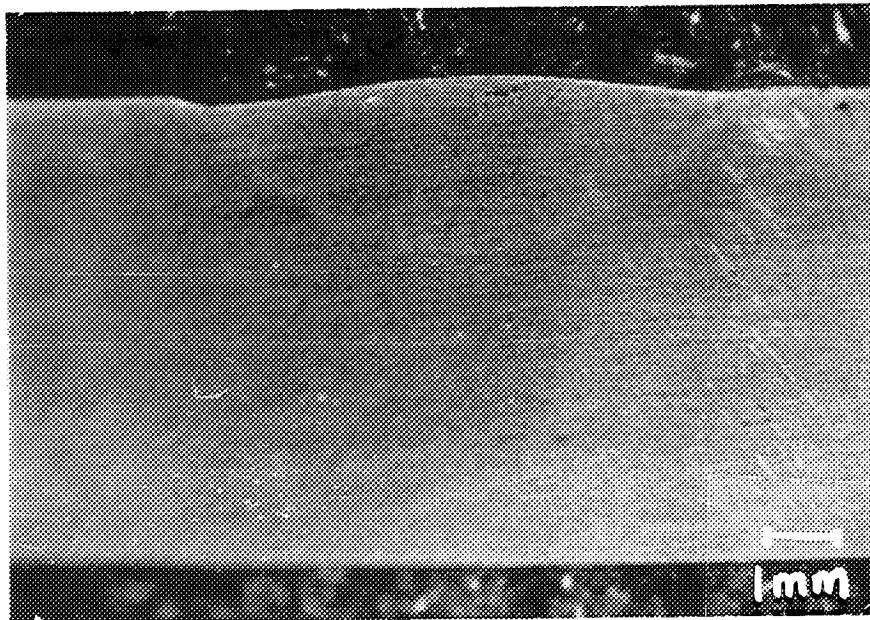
Surface of Weld 3 Made with Cup 3.
